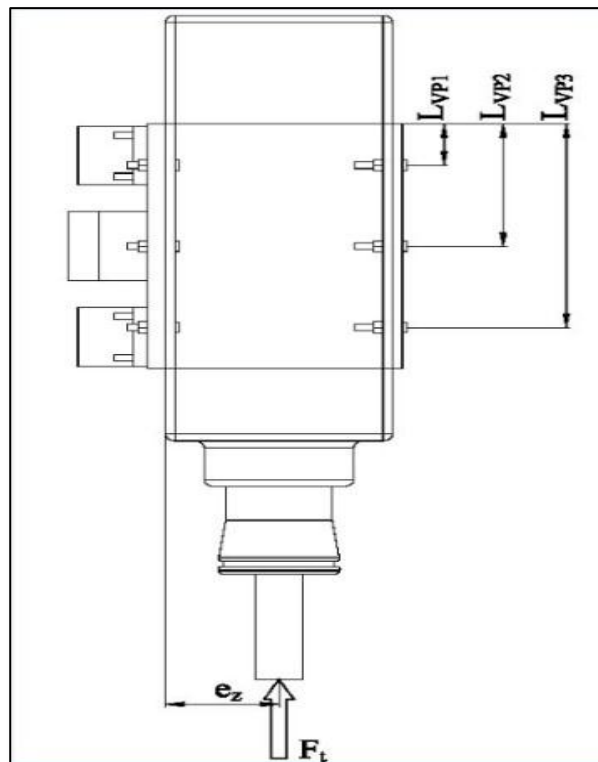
Distances of bolt from tilting edge when cutting along Z-axis
